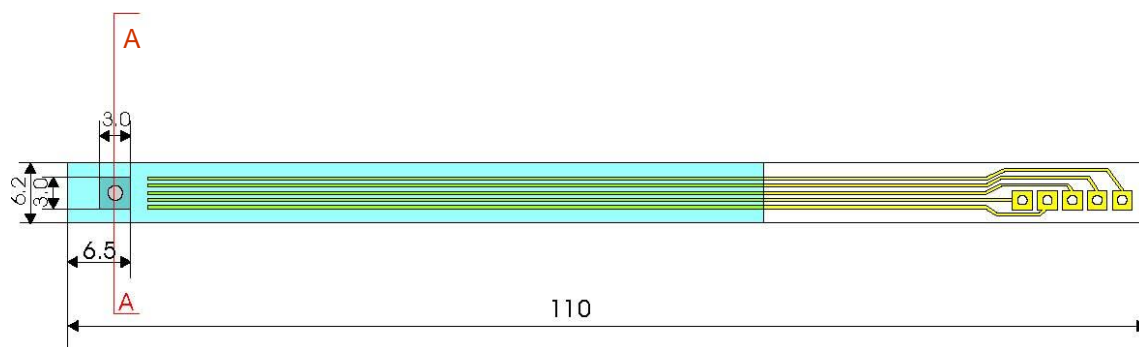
Probe stick used to package the ISFET (All dimensions are in millimeters.)
